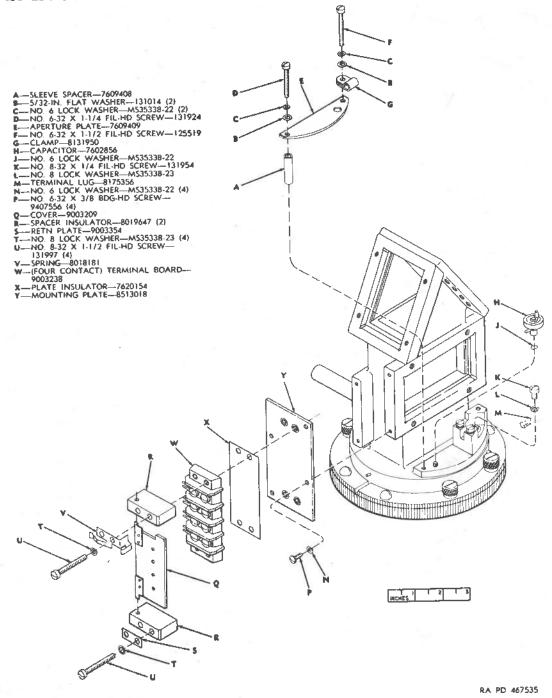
Lower waveguide assembly 8513008—partially exploded view.
